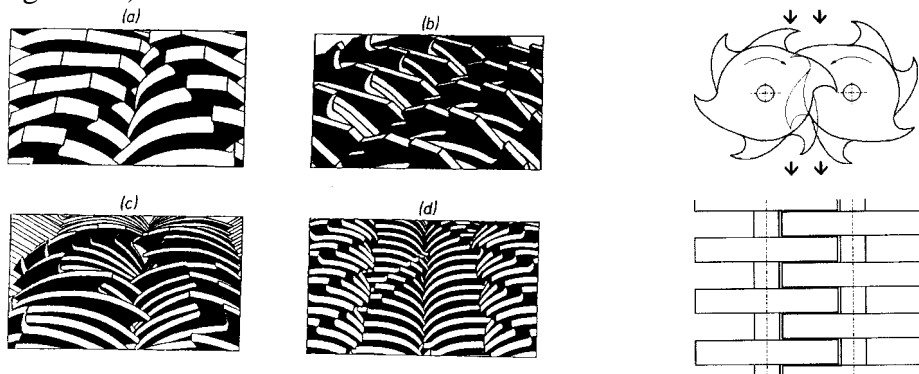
Positioning of rotary shear/shredder with two-rotor machines [5]
